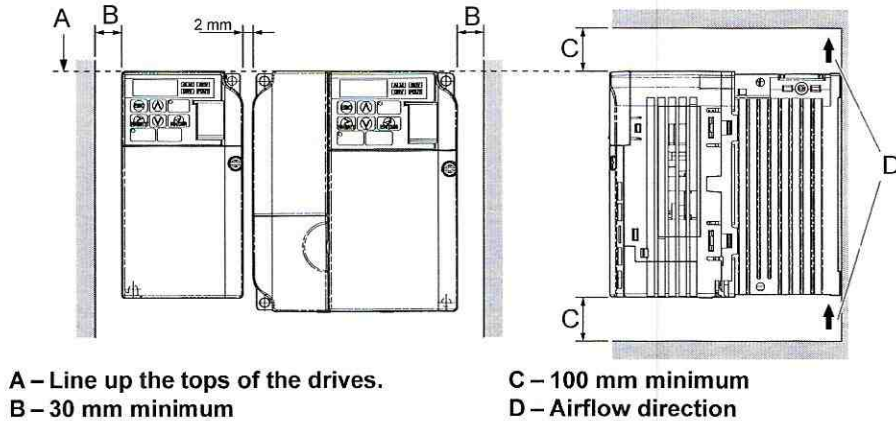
Space Between Drives (Side-by-Side Mounting)
